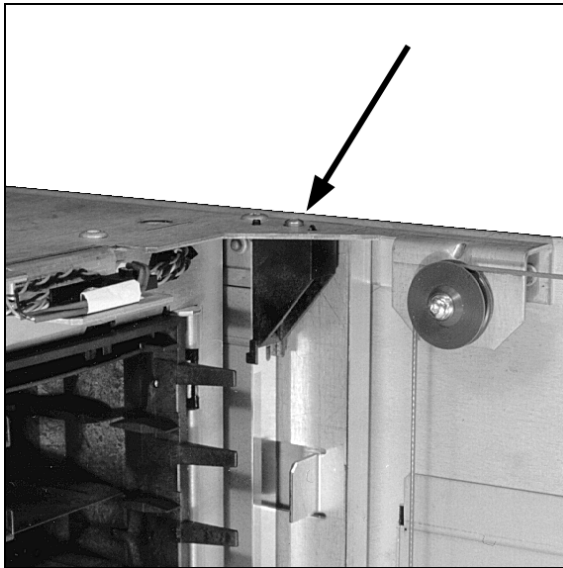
Vertical Encoder Strip Top Mount and Screw
